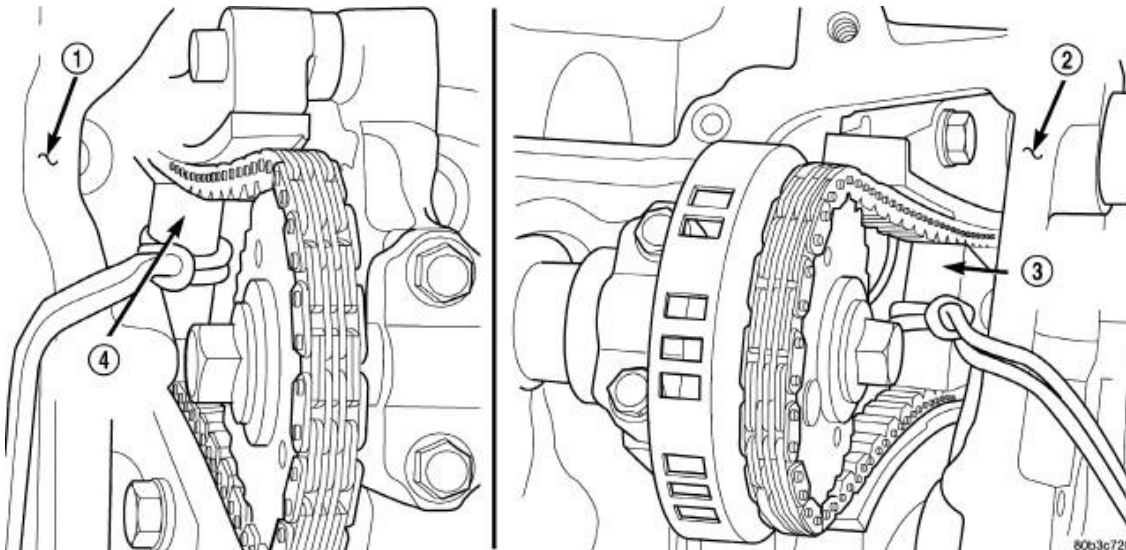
Securing Timing Chain Tensioners Using Timing Chain Wedge
